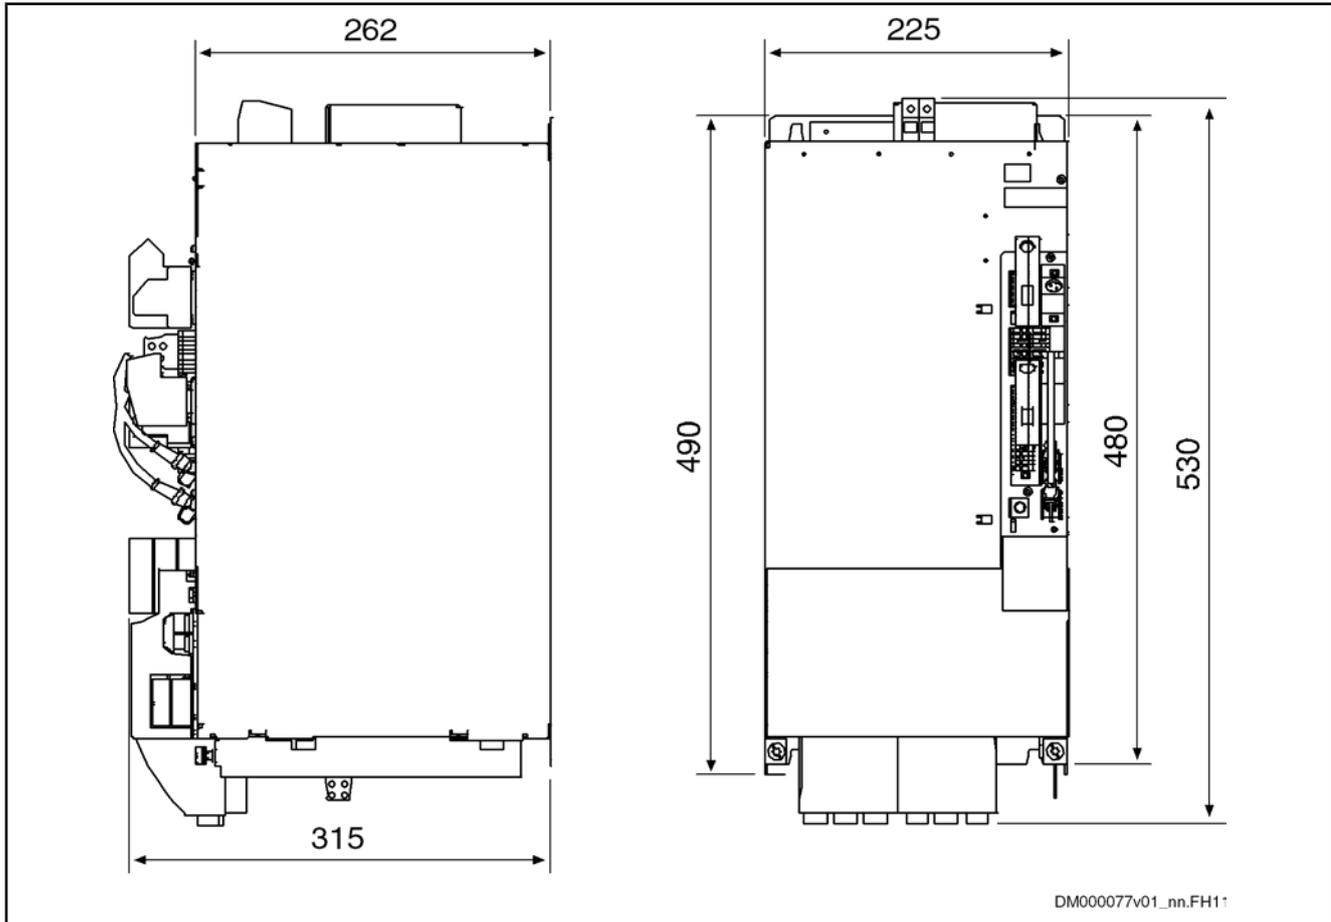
Dimensional drawing HCS03.1E-W0100 and HCS03.1E-W150
